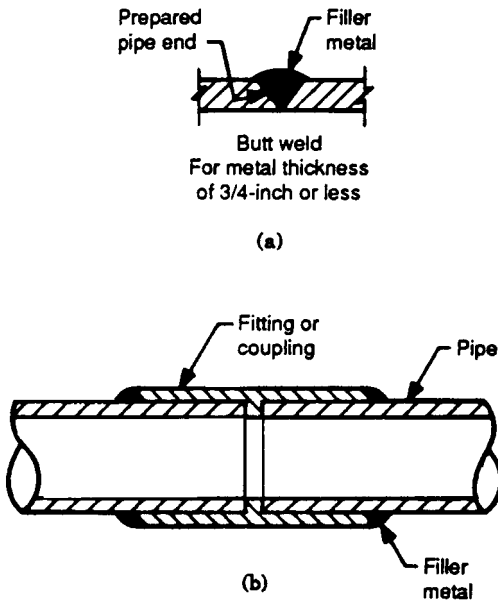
Typical welded joints. (a) Butt weld; (b) socket weld.
